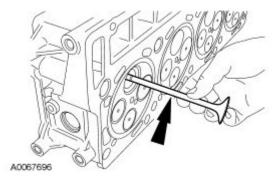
Installing Valve Courtesy of FORD MOTOR CO.
